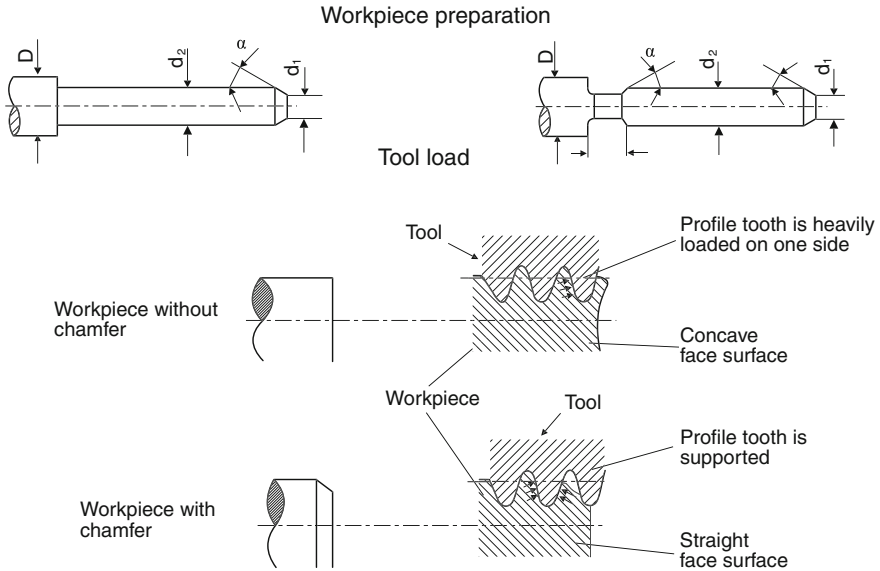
Tool load and material flow as functions of workpiece pre-machining [APEL53]
